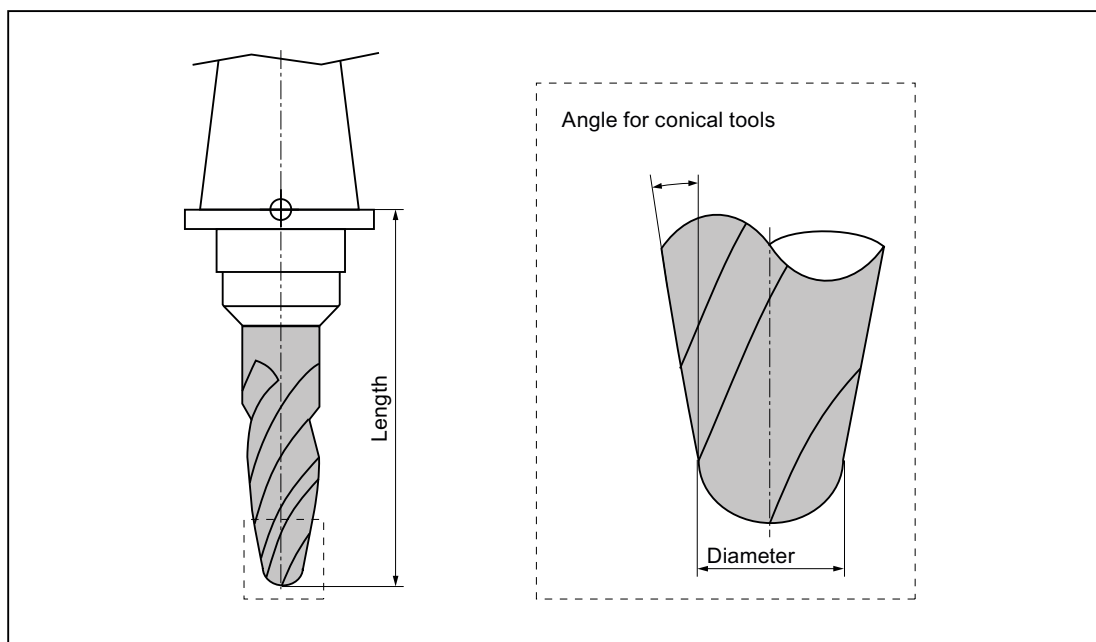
3D tool with an example of a tapered die-sinking cutter (Type 157)
